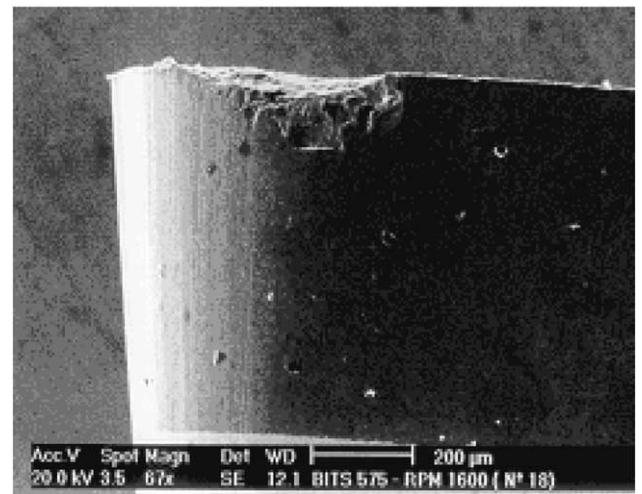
Views of the clearance face of the worn tool with the best wear condition with cutting parameters: $f = 0.055$ mm/rev, $v_c = 160.77$ m/min, doc = 0.1 mm.
